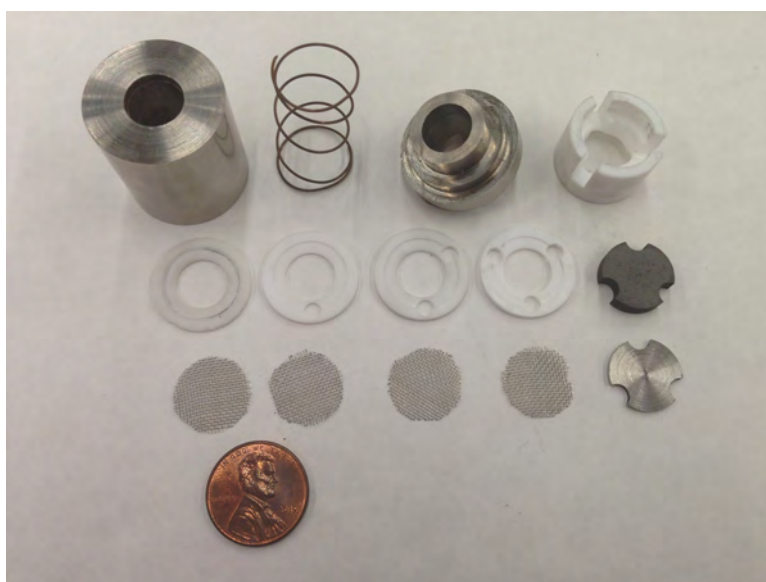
Final Disassembled RPA Showing All Parts (Penny for Scale)
